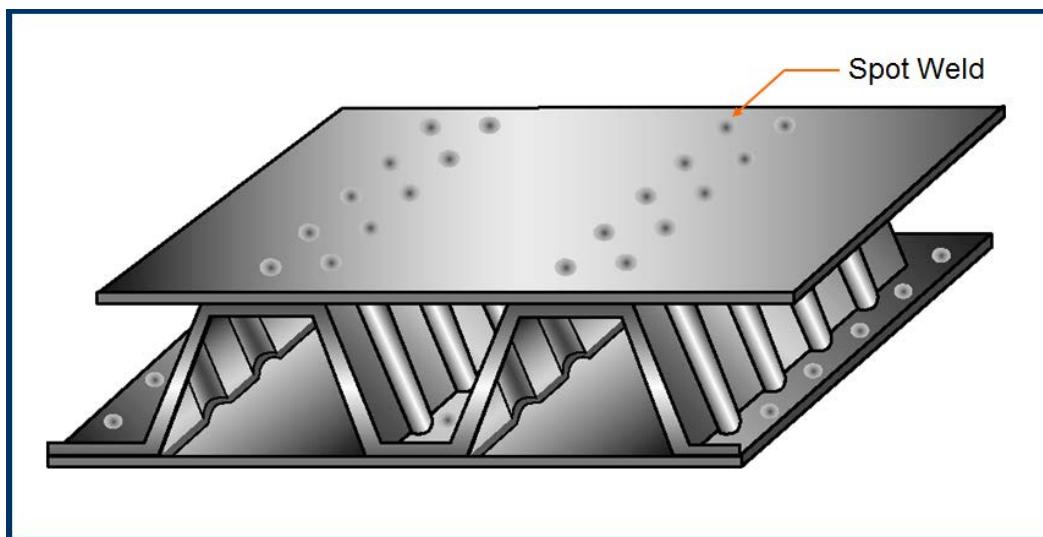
Weld-Bonded SPF Beaded Web Truss Core Sandwich.
